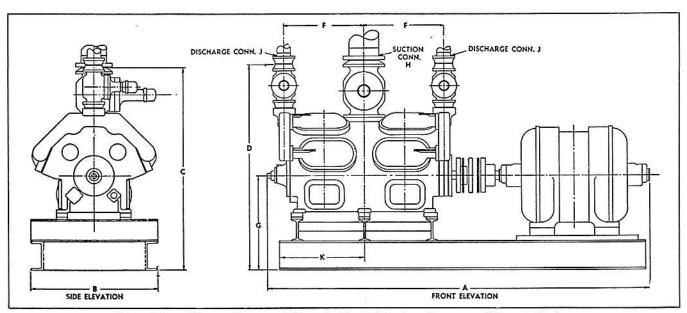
Dimensions - 12 and 16 Cylinder Freon - Direct Drive
